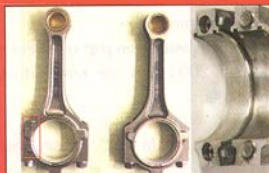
Dimple rod on left and plain on right, they are completely interchangeable. No difference in weight total or end for end. Insert shows the "cracked" rod parting line. Notice the pin bushings for a full floating piston pin.
